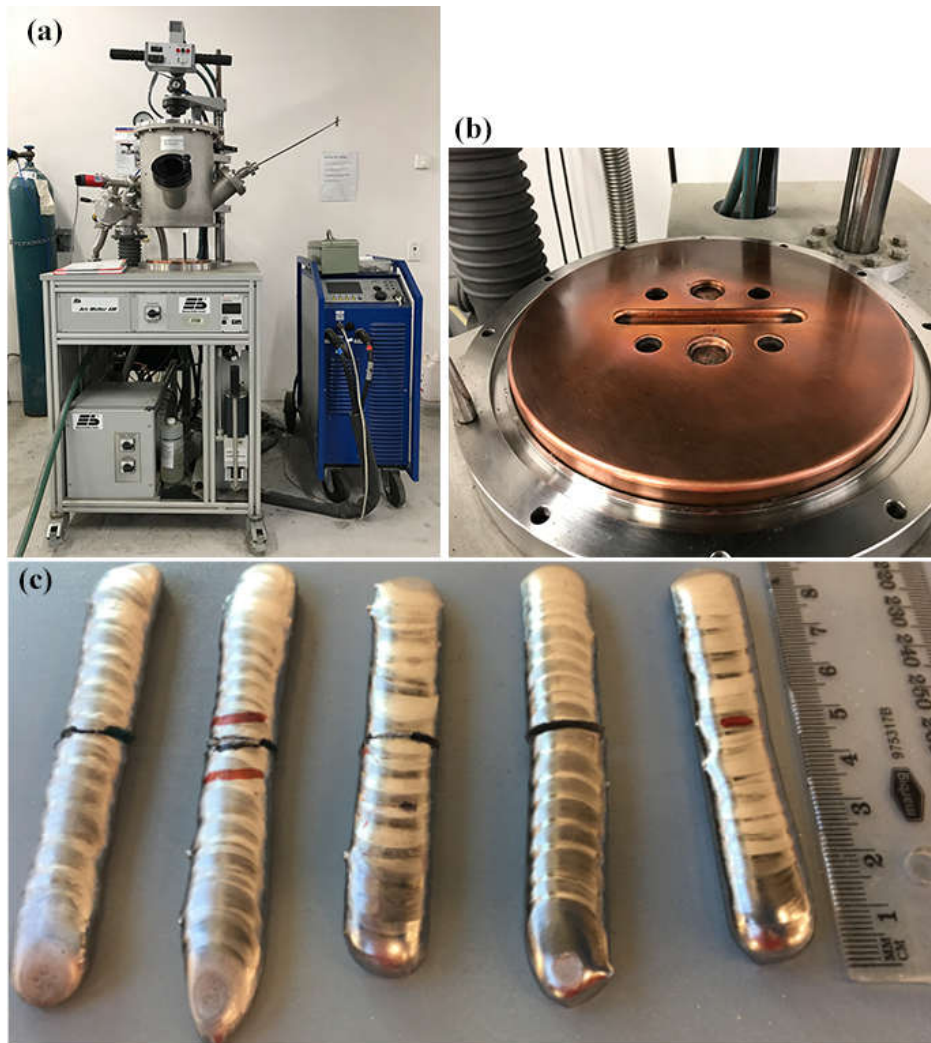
(a) Arc Melter AM200 (Edmund Bühler GmbH), (b) Water-cooled copper crucible plate with multi-purpose moulds (for button and rod samples), (c) the as-cast ingots.
